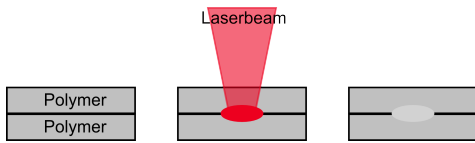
Schematic view of the laser welding process. Two polymers are a clamped together and melted at the contact area by a laser.
